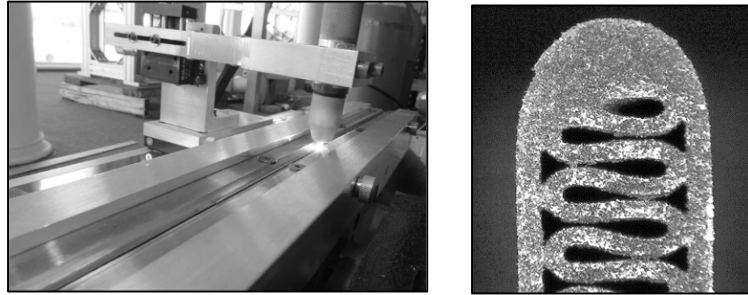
Linear PAW panel weld system. Single torch system shown (left), section view of welded panel (right).
